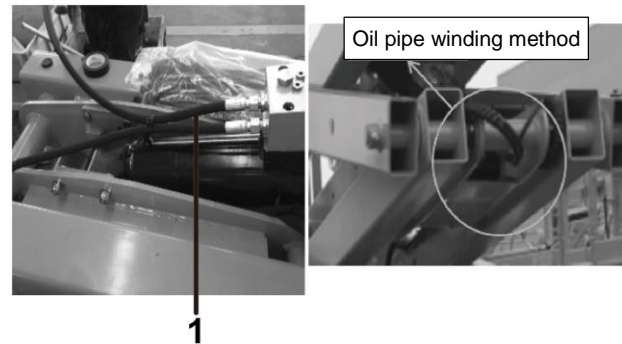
Routing and connecting oil pipes (SR4069E)
